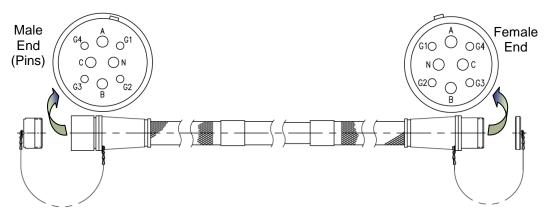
Optional Military Style M-100Amp, 50-Foot Cable Assembly
